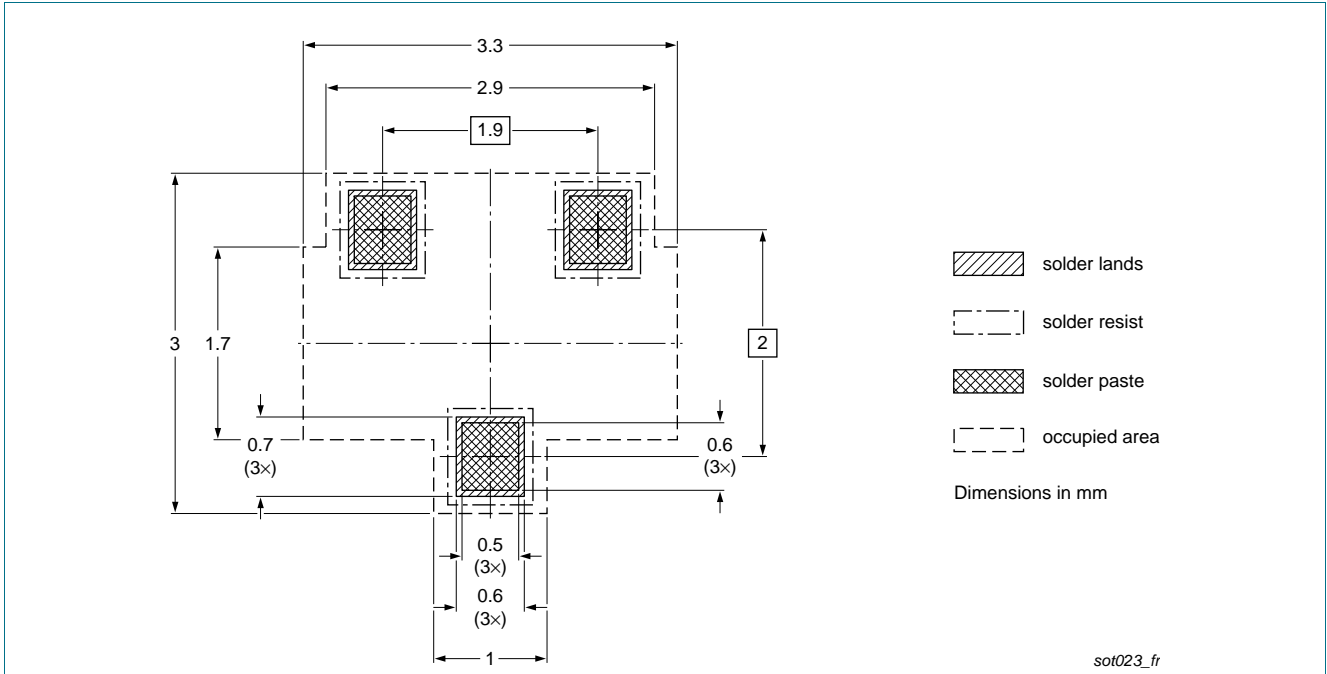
Reflow soldering footprint for SOT23 (TO-236AB)
